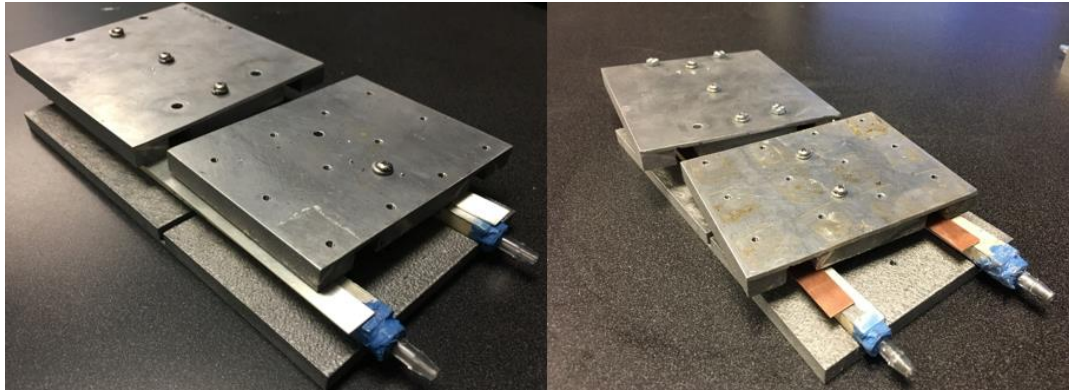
Exploded view of conventionally assembled cold plate including ceramic tube, gauge 20 silver (left) or copper (right) off-the-shelf plate and #4-40 stainless steel screws torqued to 4.7 IN-LB to 3- piece SLM aluminum metallic block.
